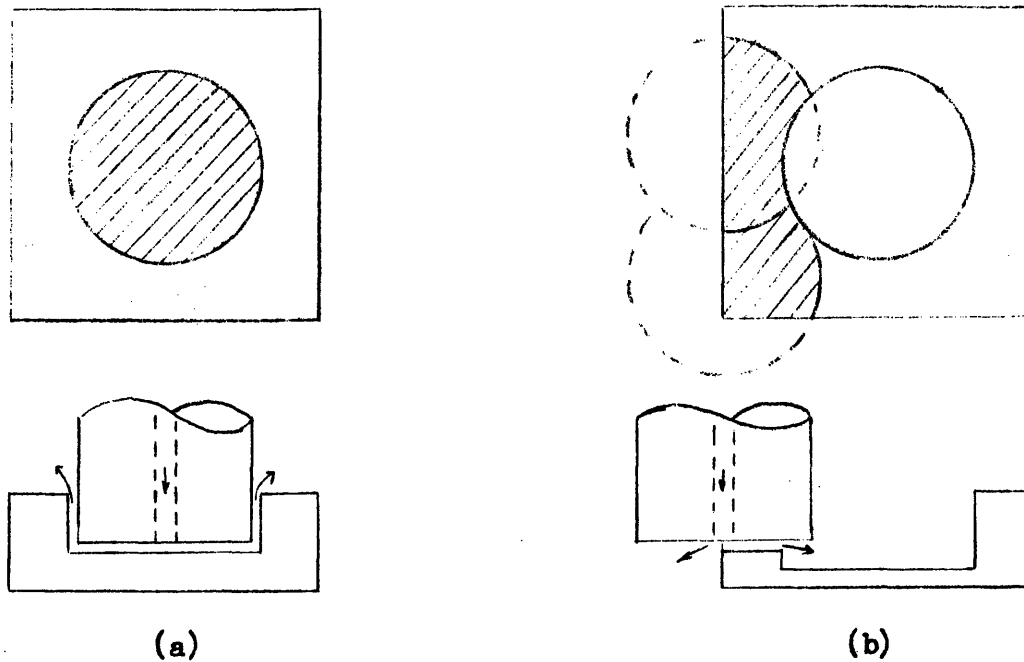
Machining geometry used to show that more large particles are collected under some conditions (b) than under others (a).
